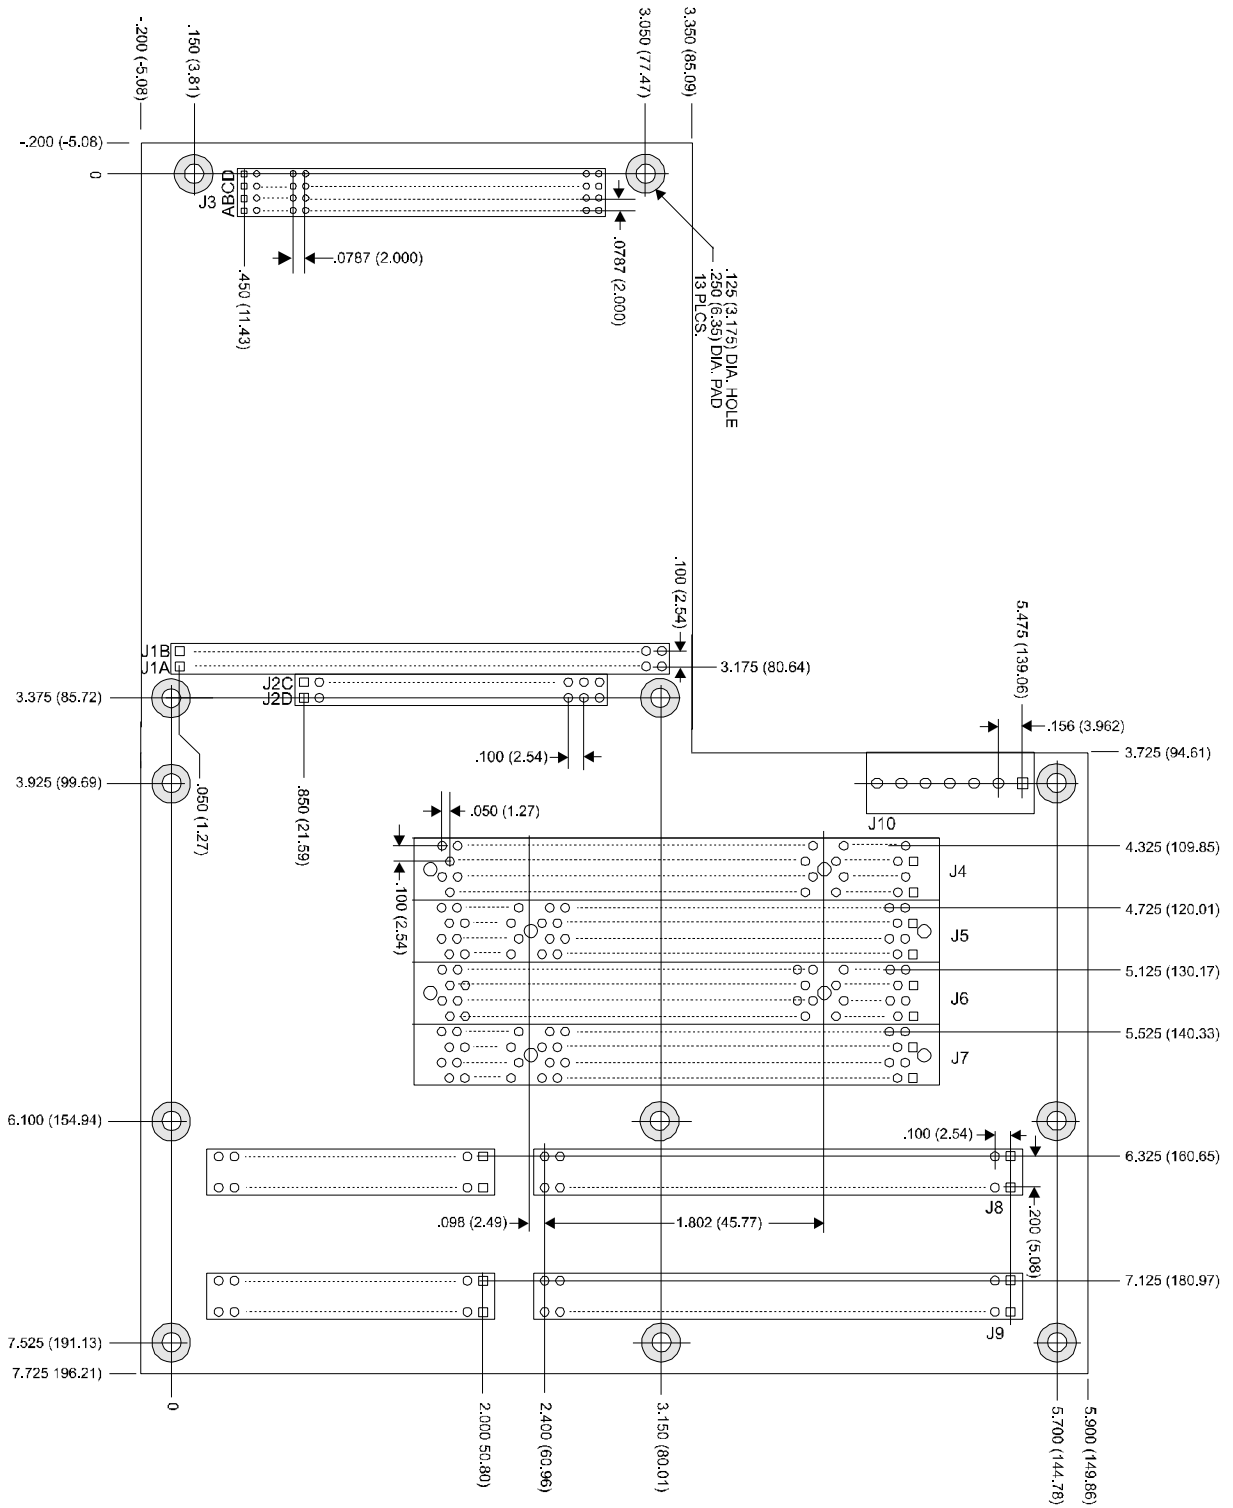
Dimensions, Expansion Backplane, '-Plus' Platforms
